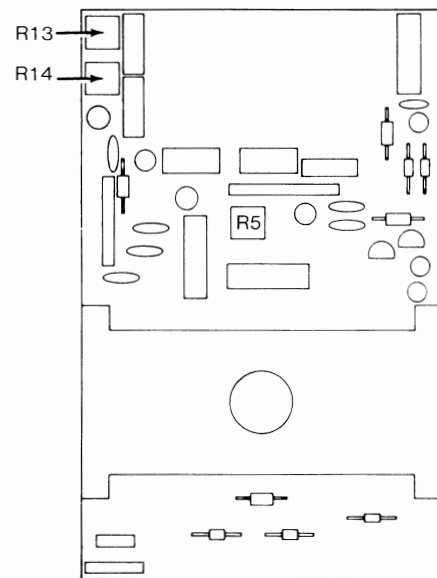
B. Large Circuit Board Assembly (RMS 3030)
